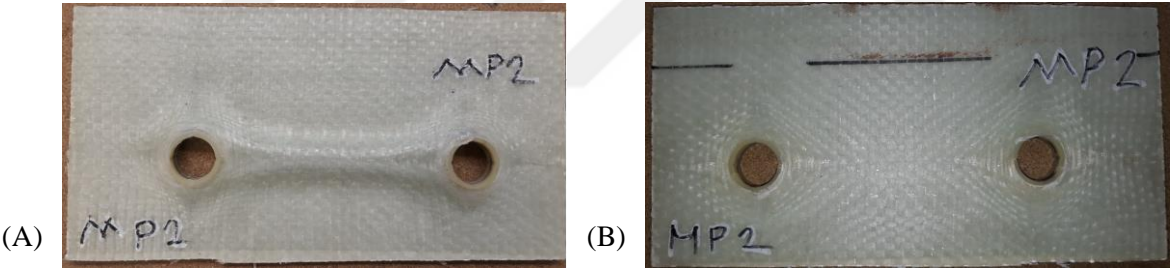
Non-drilled, metal-polymer inserted laminate. (A) Top view and (B) bottom view
